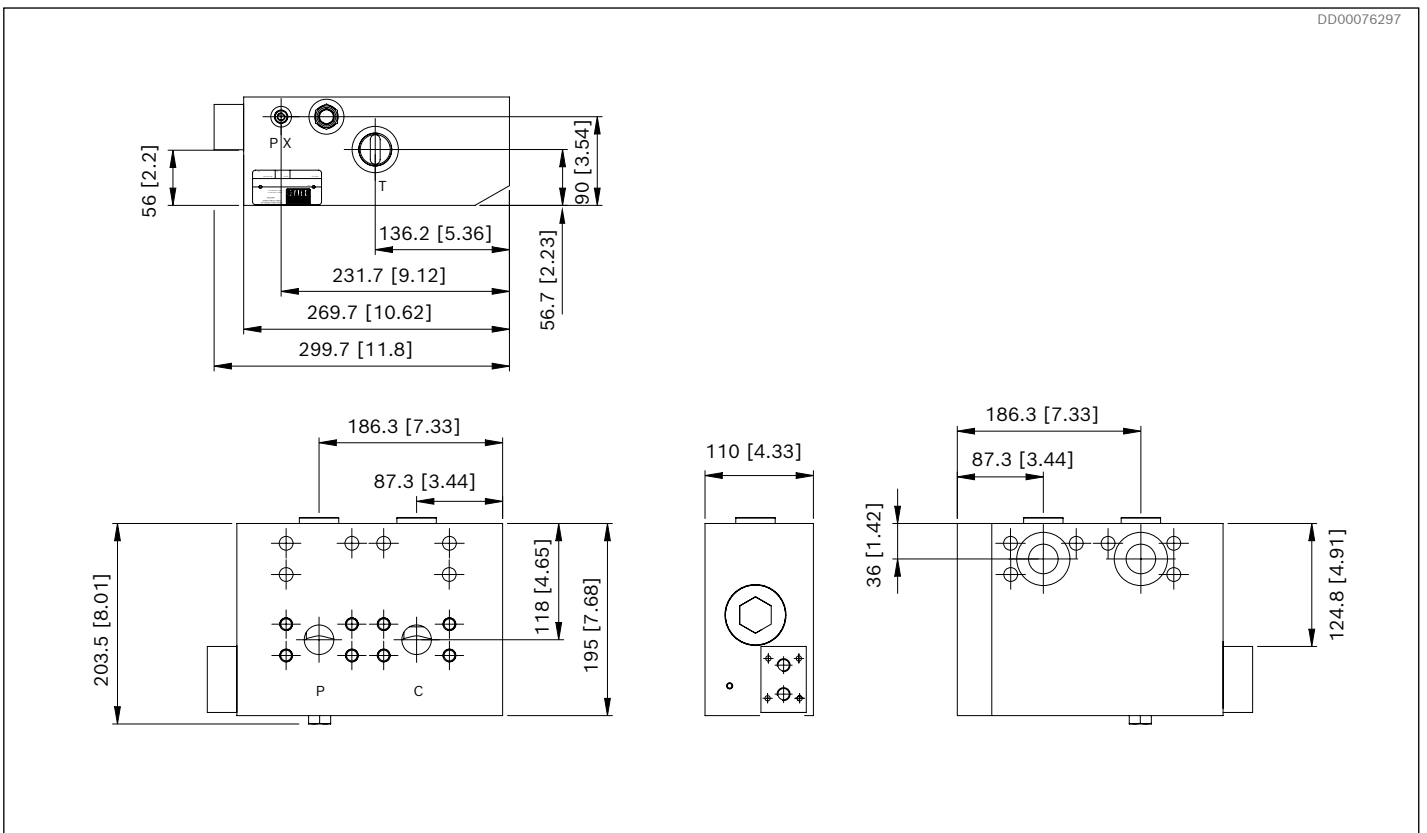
Dimensions VFWCB 600 H, VFWCB 600 H Ex
